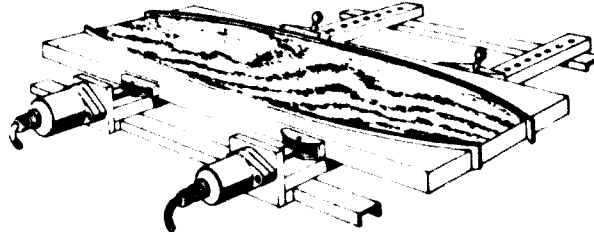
Edge lipping press. The width and the shape is roughly fixed by two adjustable fixed stops, clamping is by the two pneumatic cylinders which can be slid freely over the whole length of the press.
